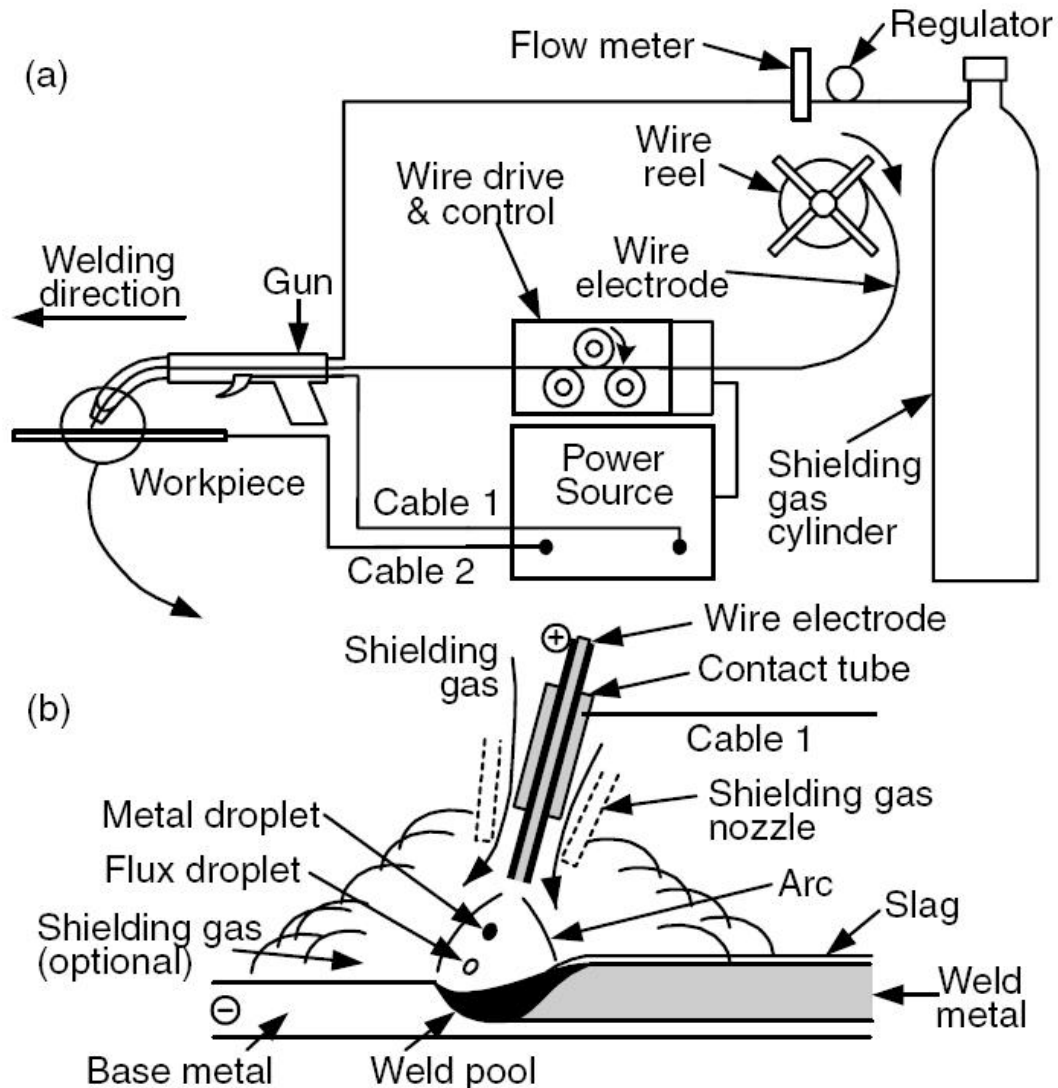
Flux Cored Arc Welding Process a) Overall Process and b) Welding area [6]
